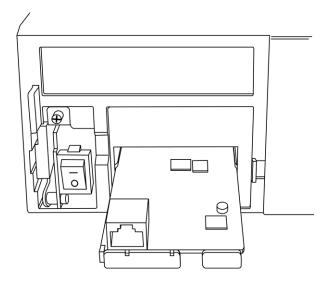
Installing PZ-BS11 Blade in Expansion Chassis
